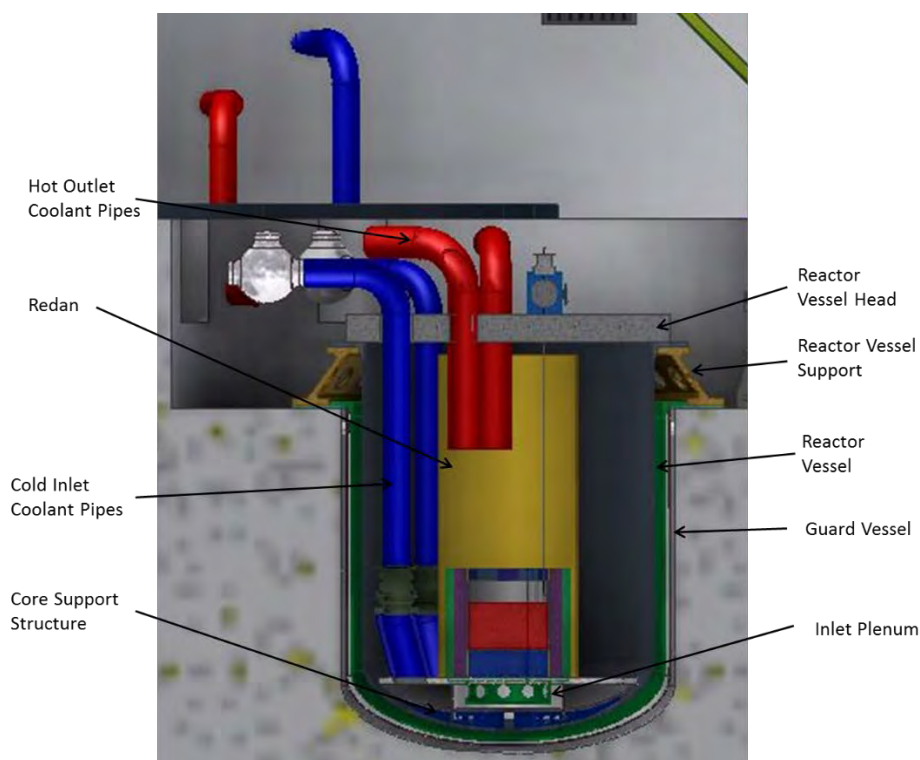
SLFFR-1000 Reactor Vessel Assembly
